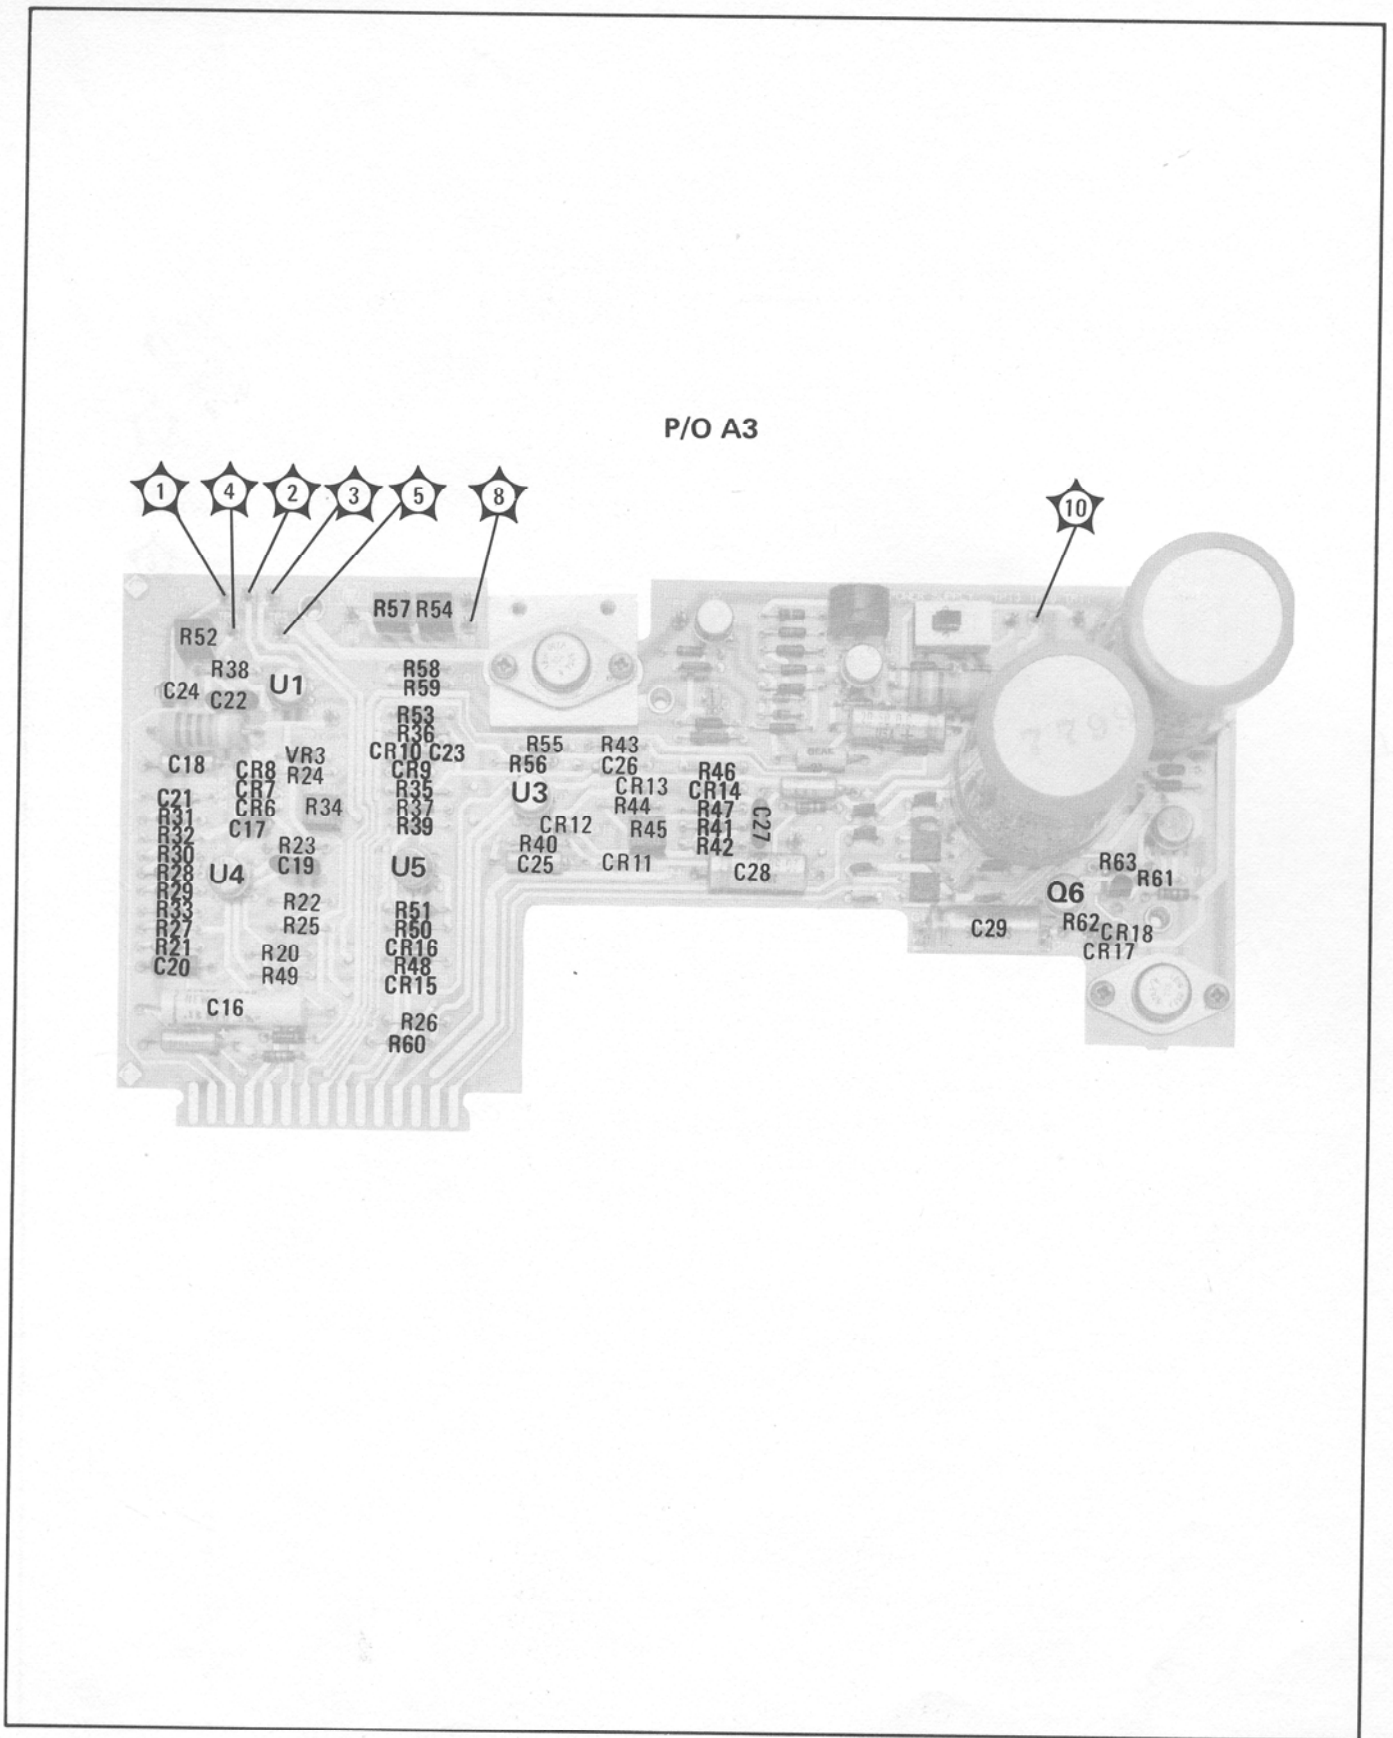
P/O A3 Control/Power Supply Board Assembly Component Locations
